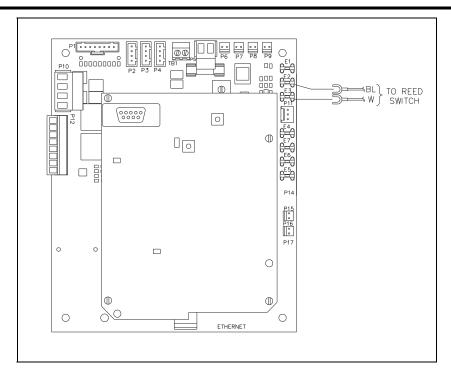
VoIP Carrier and Circuit PCBAs (for Models 246-700 and 256-700 using the 69631 PCBA)
